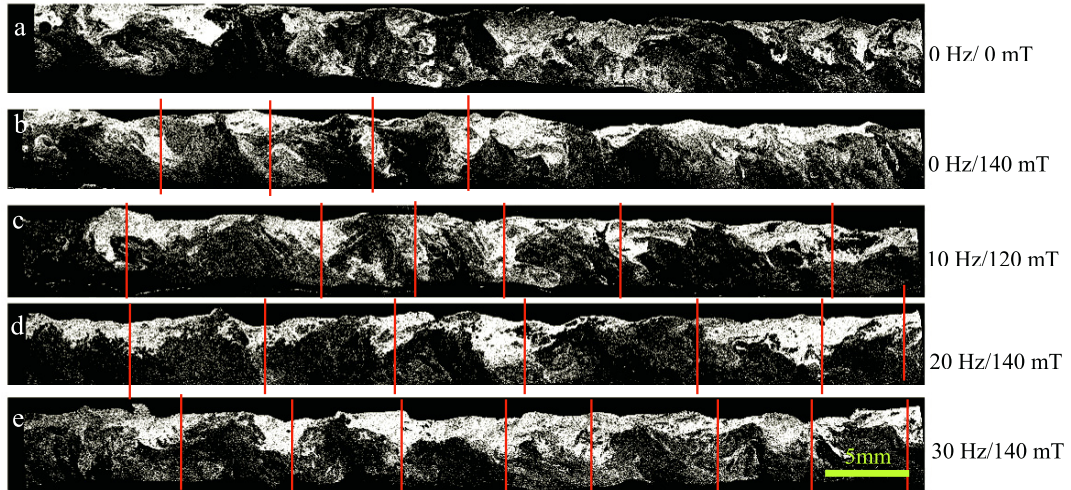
WDX mappings of the longitudinal sections of welds with different magnetic fields (Welding parameters: laser power = 5.5 kW; welding speed = 8 m/min; wire feeding speed = 6 m/min)
